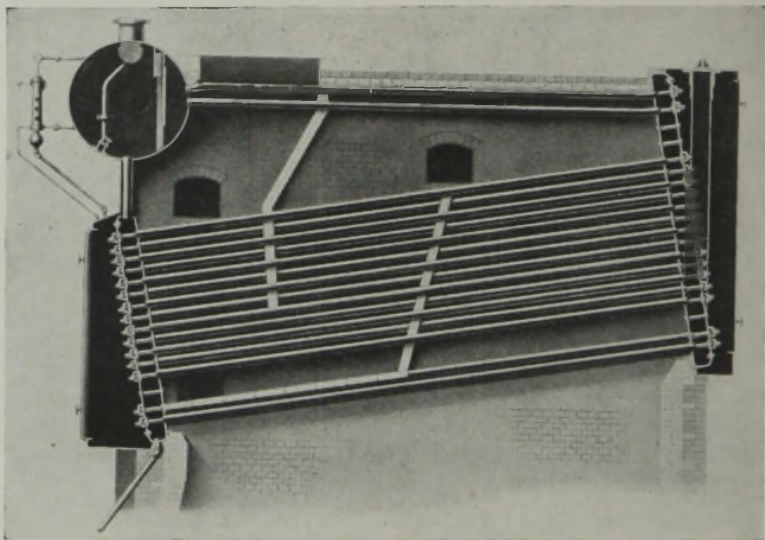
Sectional side elevation of C-E Heine cross-drum boiler.
